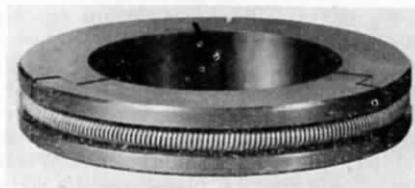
BRITIMP PACKING RING FOR PISTON RODS AND VALVE SPINDLES.
